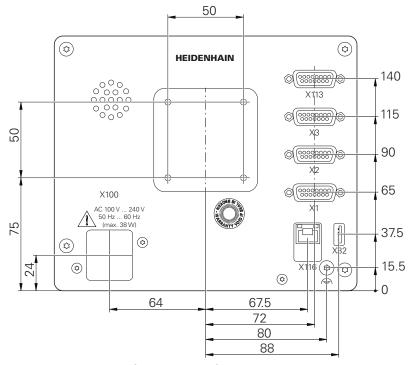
Dimensions of the rear panel for devices with ID 1089178-xx
